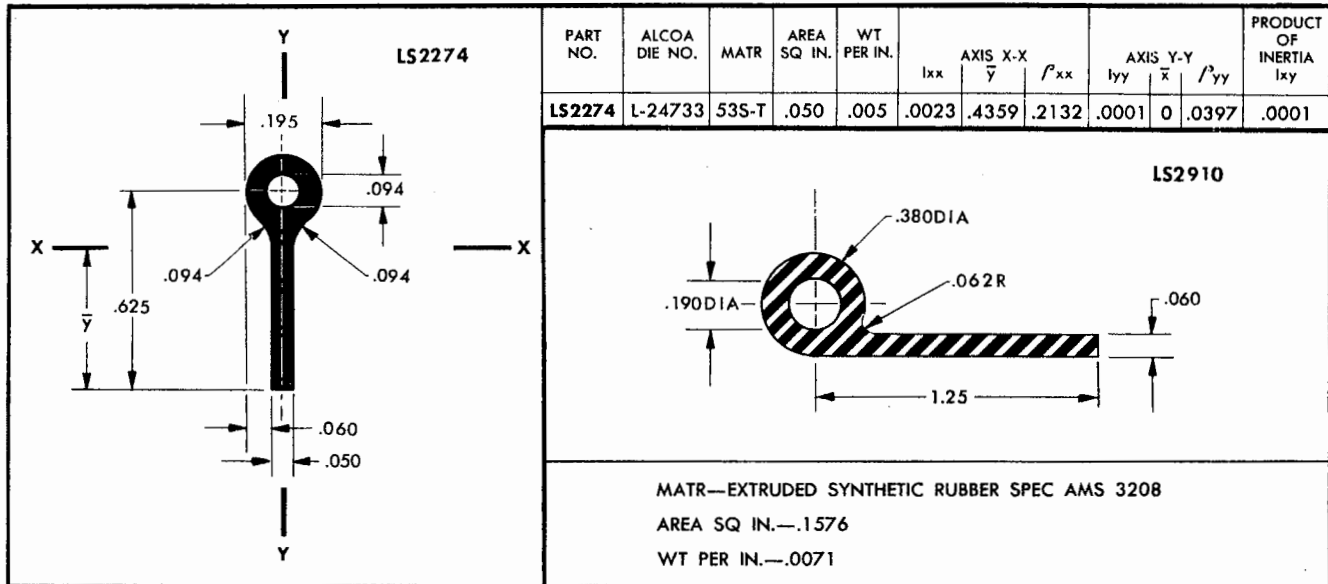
(Sheet 17B of 17 Sheets) — Extruded Standards
